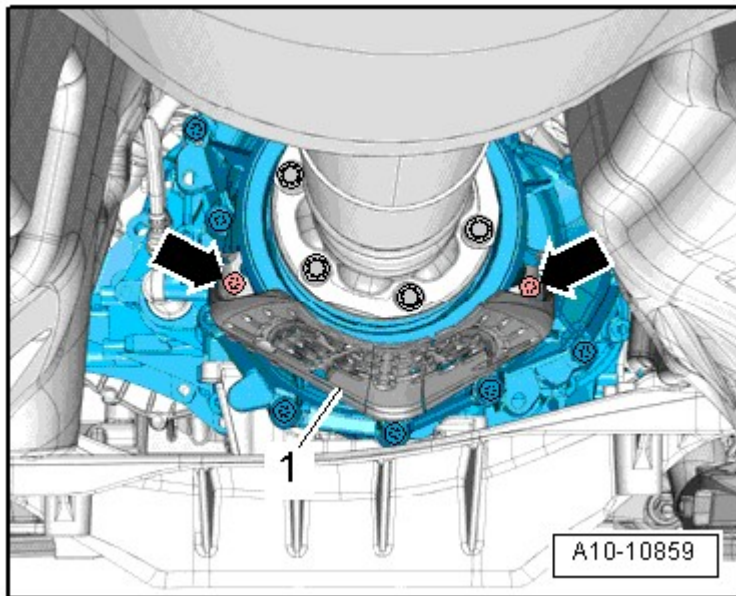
Driveshaft Heat Shield - Tightening Specification
